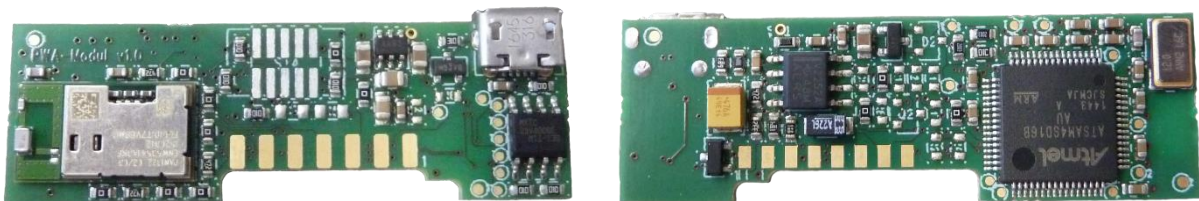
PWA module without pin header (bottom layer - left side / top layer - right side)
